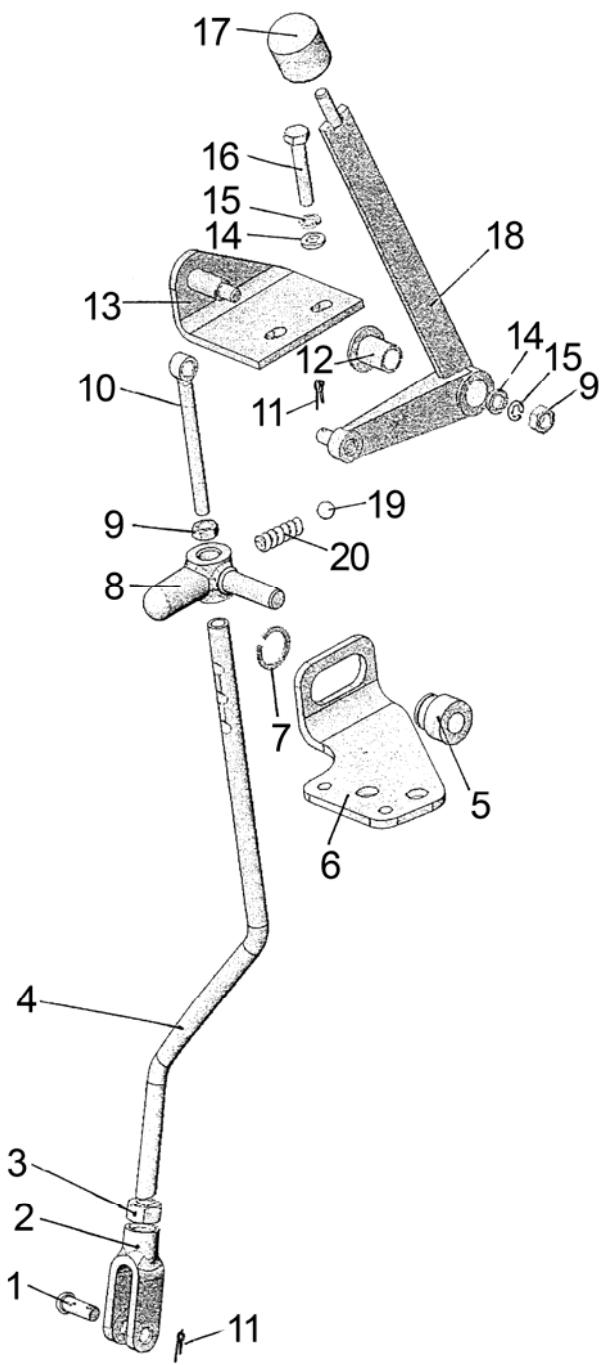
Transfer gearbox control (for single-lever gearbox control mechanism)
